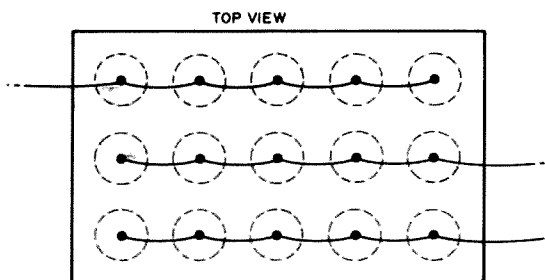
Similar resistor banks are connected together on the underside of the assembly.
